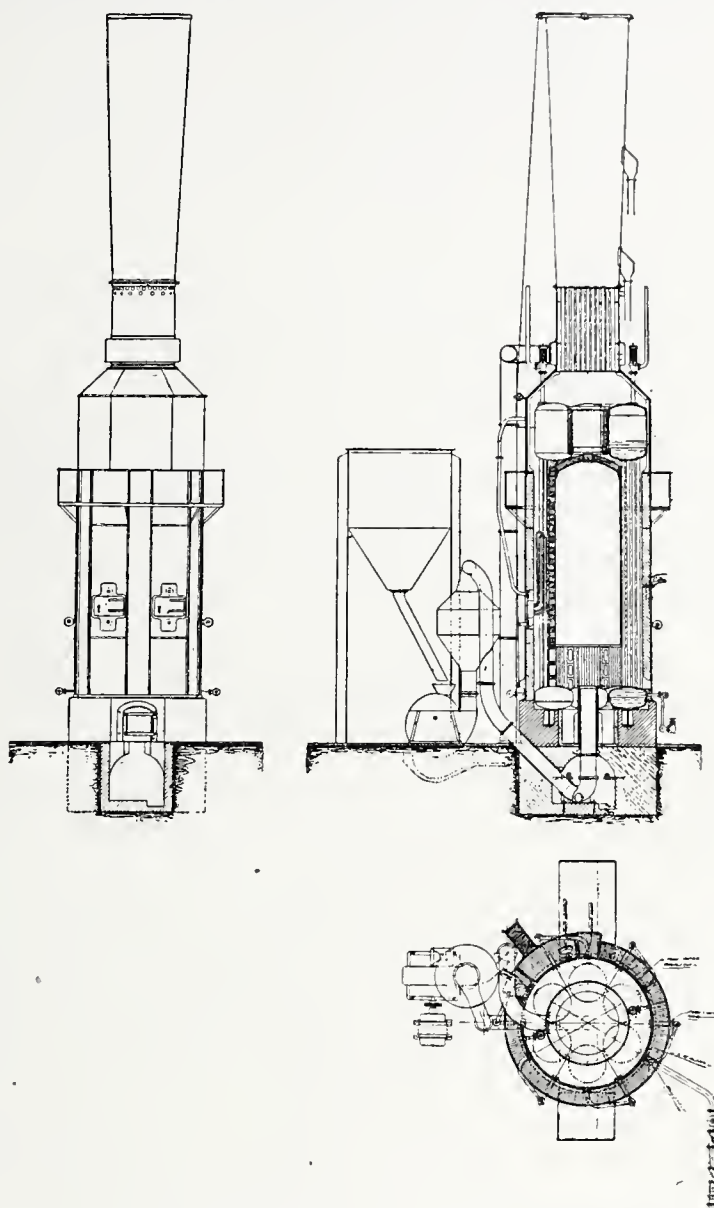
Sectional Elevation and General Arrangement of Bettington Boiler and Combustion Chamber. (*Fraser and Chalmers, Ltd.*)
